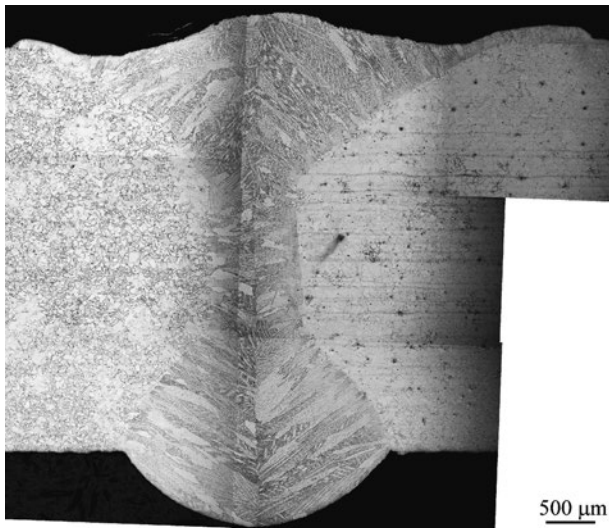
Microstructures of cross section of Inconel 601 hybrid weld at laser power 6 kW, welding current 150 A and welding speed 2 m/min.
